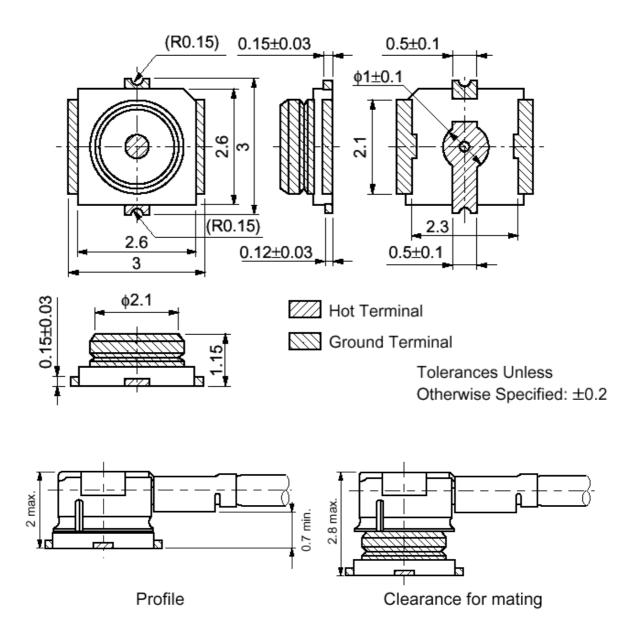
Mechanical dimensions of MuRata GSC connector (in mm)
